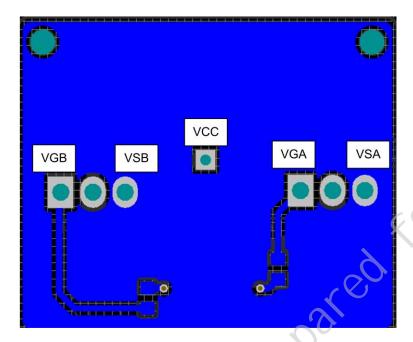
MK1620 Demo Board Layout (Bottom Layer)
